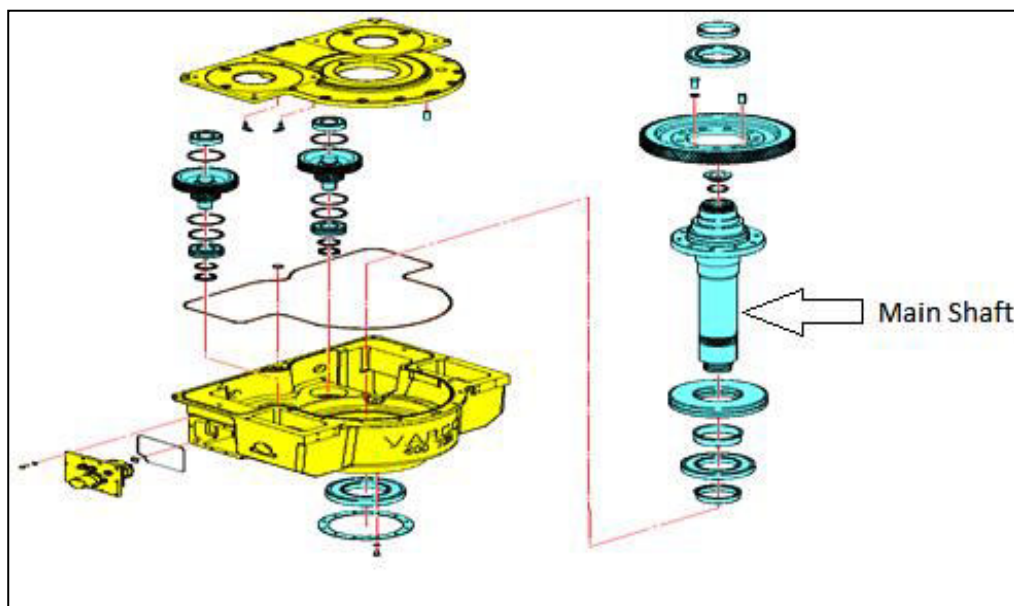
Gear case (La Boîte d'engrenage)
